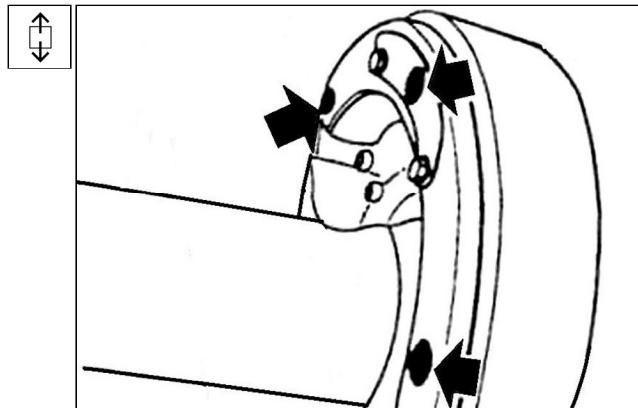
Plugs of inspection holes for measurement of the brake lining thickness – removal
